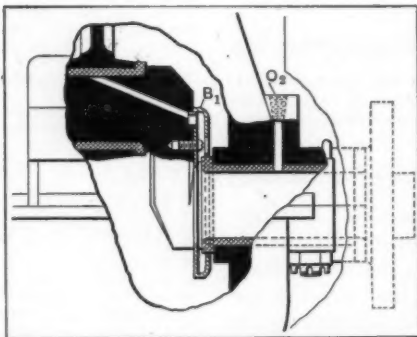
Section of a crankcase, showing the crankshaft in place and a baffle plate with a curled edge adjacent to the cheek of the crankshaft, with a diagonal hole drilled in the pin passing through the cheek for purposes of lubrication by centrifugal force
